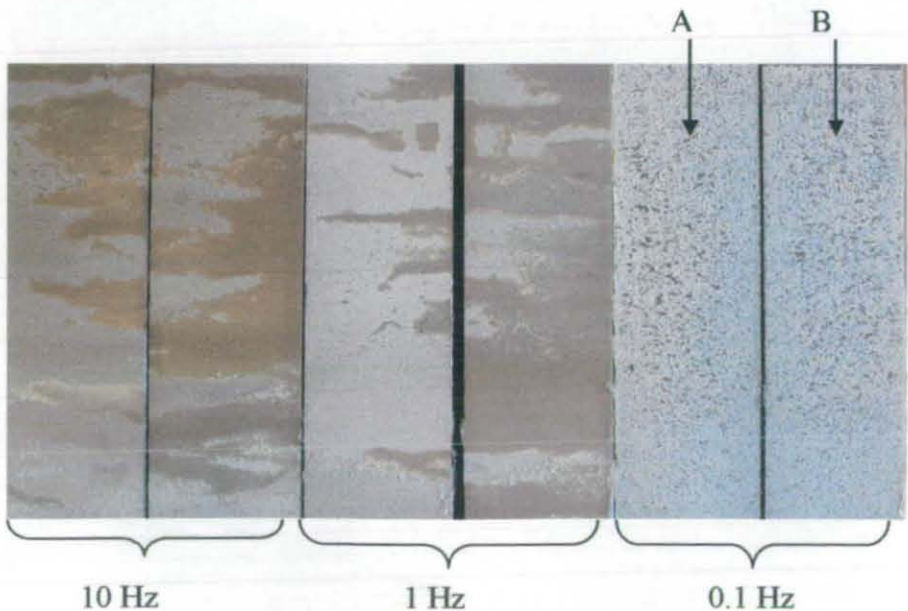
Image of failed test specimen of mild steel joints tested at 90°C.
